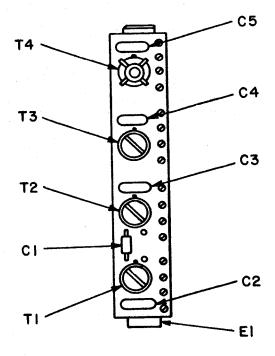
15 MHz Subassembly A2A4A5, Component Locations
